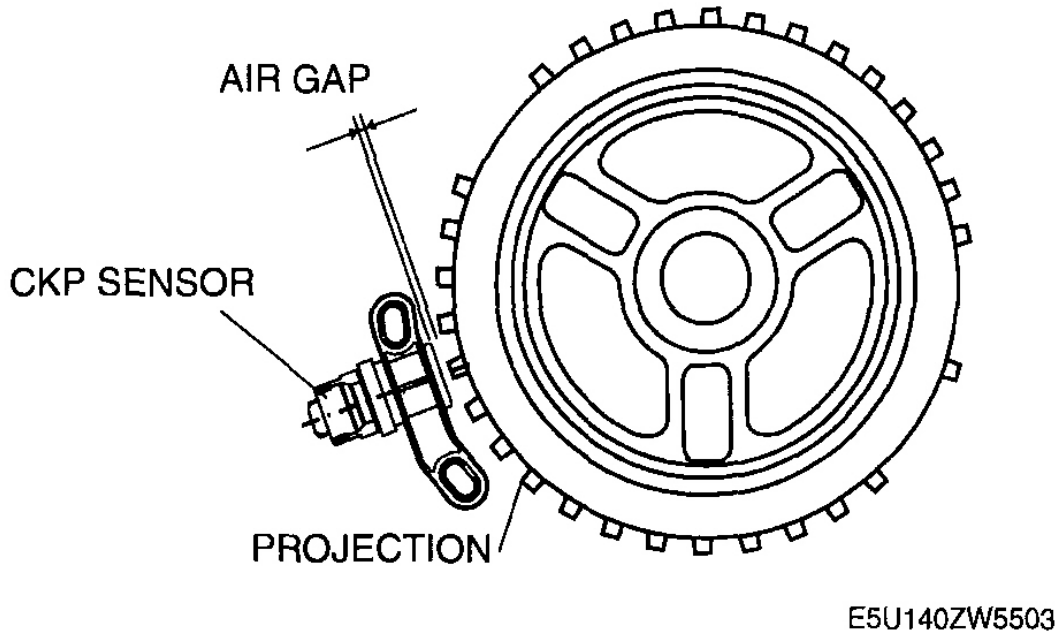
Identifying Air Gap Between Plate Projections At Back Of Crankshaft Pulley & CKP Sensor
